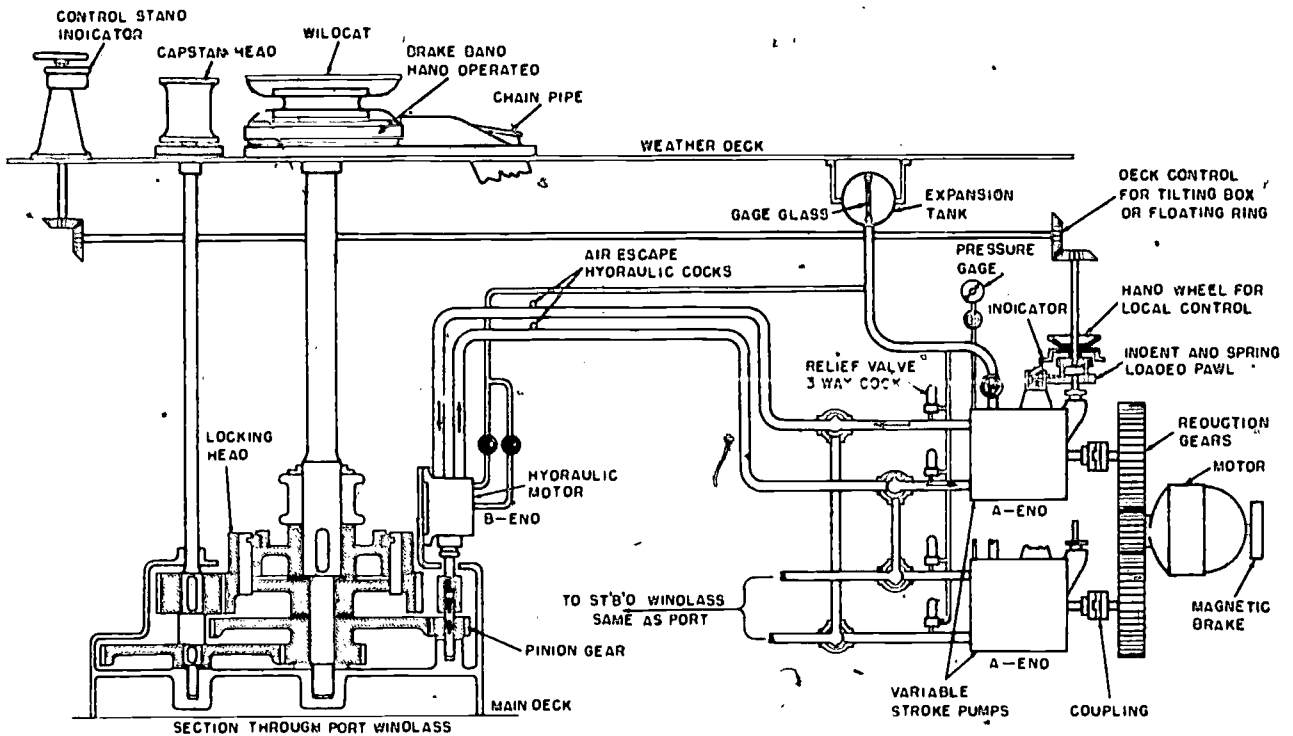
Typical electrohydraulic anchor windlass arrangement.
